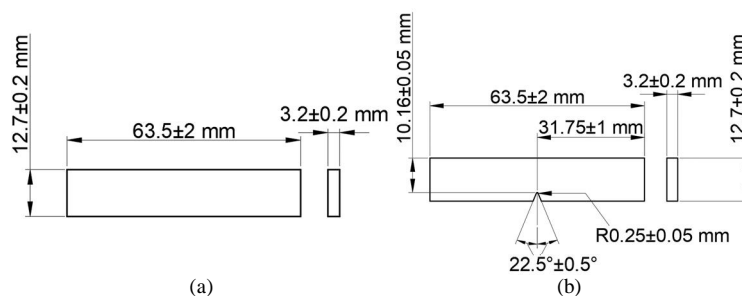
The dimensions of Izod impact test specimens (a) unnotched and (b) notched [3]
